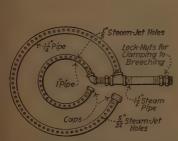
Ring or pipe-coil steamjet blower (for use in breeching or stack).
